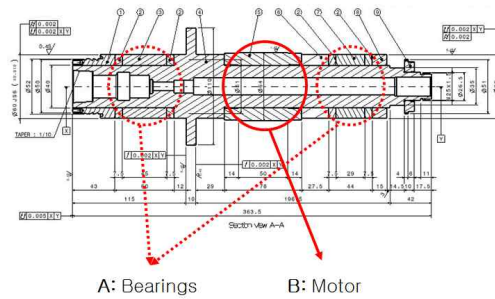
Drawing of flexible rotor with air-magnetic hybrid bearings driven by a built-in motor
